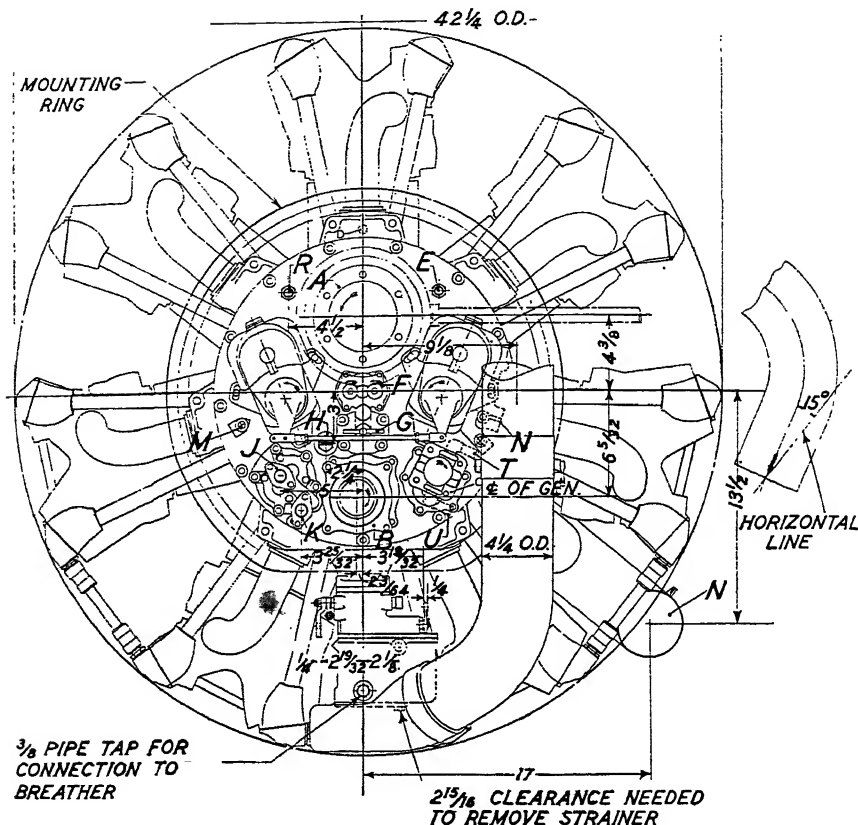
REAR VIEW OF CONTINENTAL "W670" ENGINE
